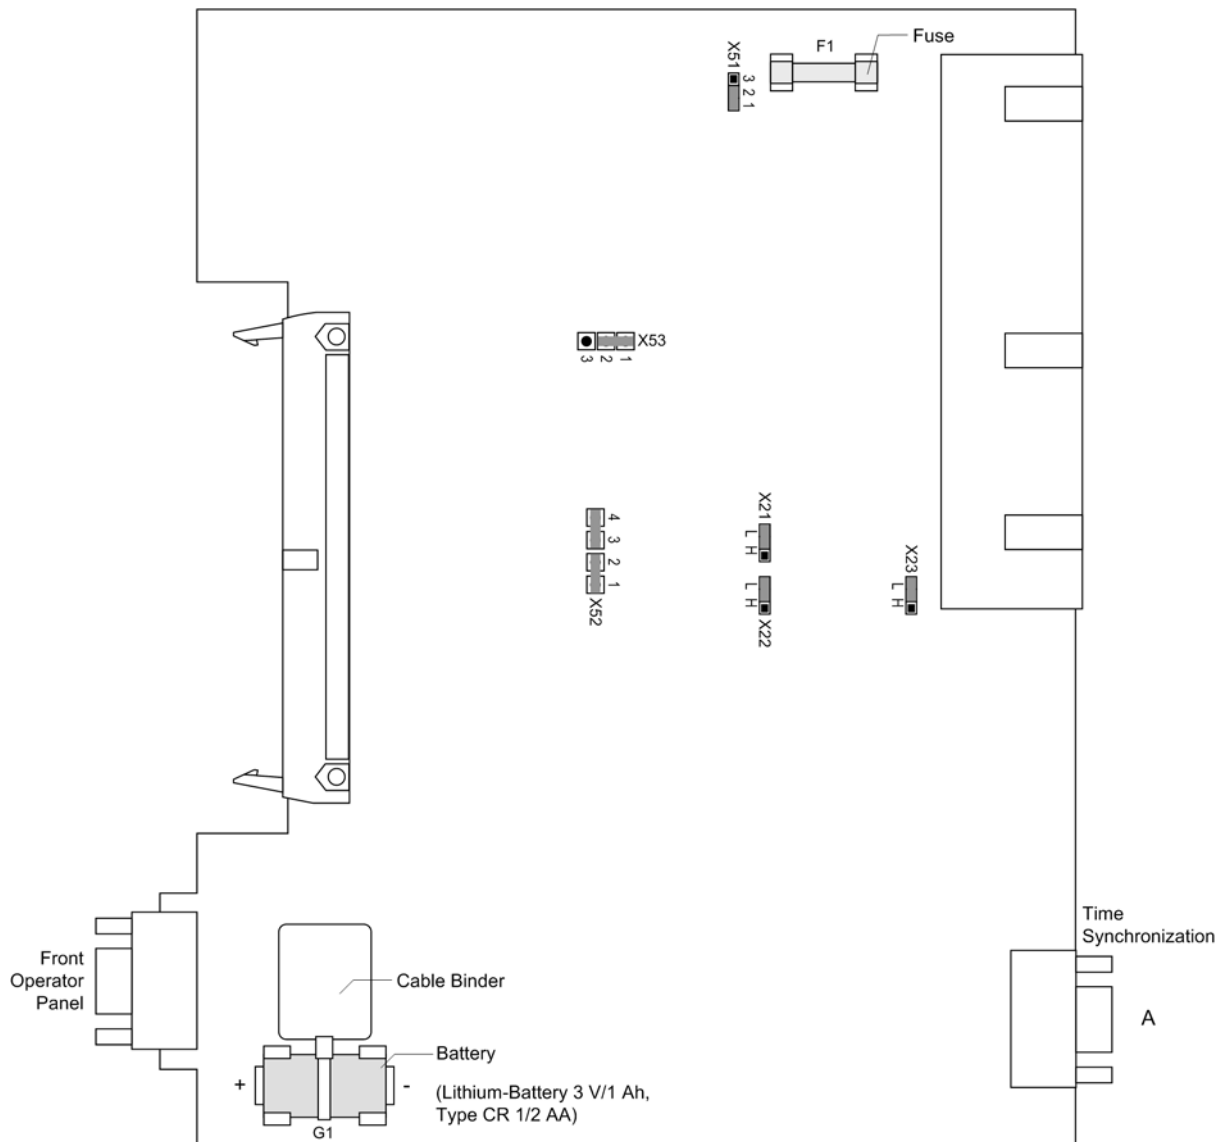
Processor printed circuit board A-CPU for devices up to release .../DD with jumpers settings required for the board configuration
